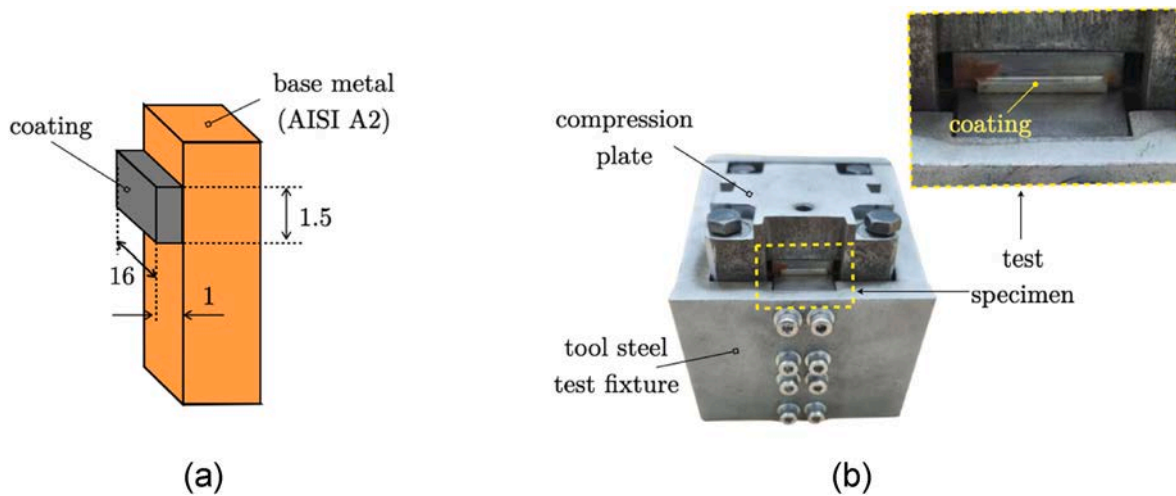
Set-up employed for shear tests. (a) Schematic of the test specimen. (b) Actual specimen within the sample holder before being connected to the loading frame of the testing apparatus. The quoted dimensions are [mm] (not to scale).
